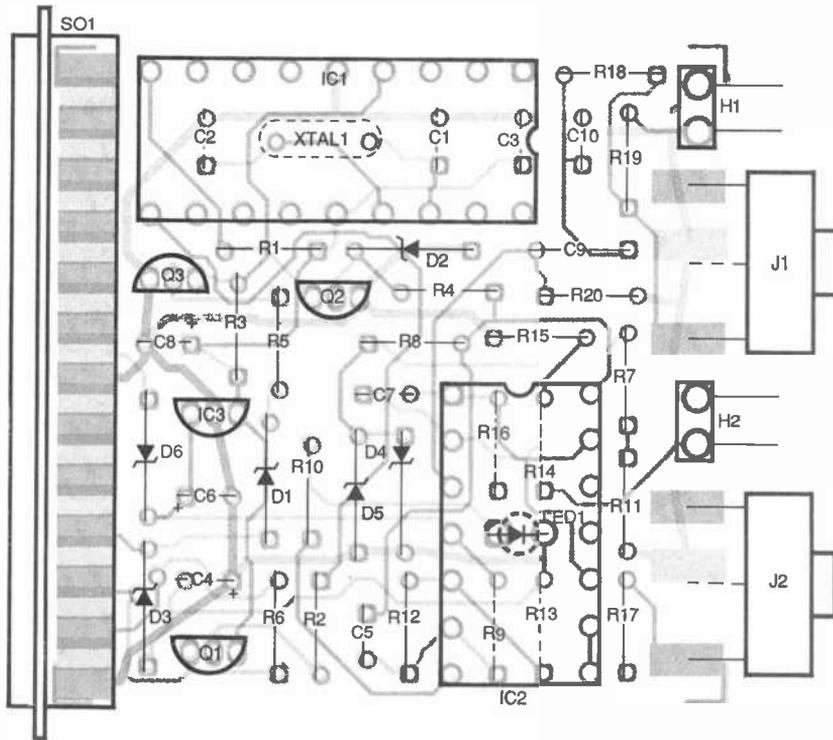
Use this parts-placement diagram as a guide when assembling the Decoder on a PC board. Note that the parts drawn with dashed lines are mounted on the component side of the board.
